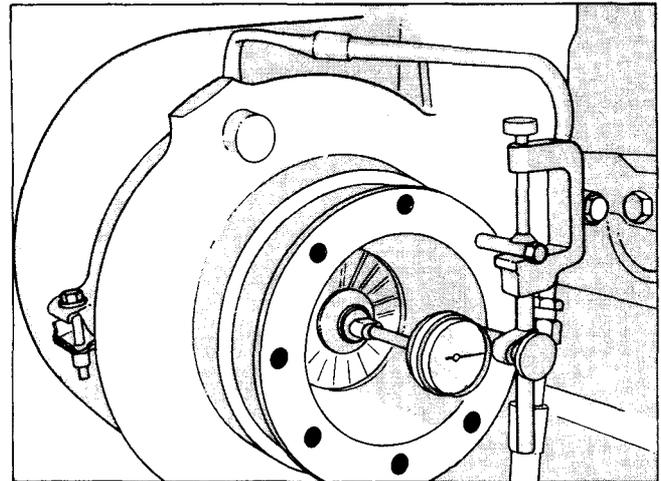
, (OM1065L). Check turbocharger bearing end clearance.
